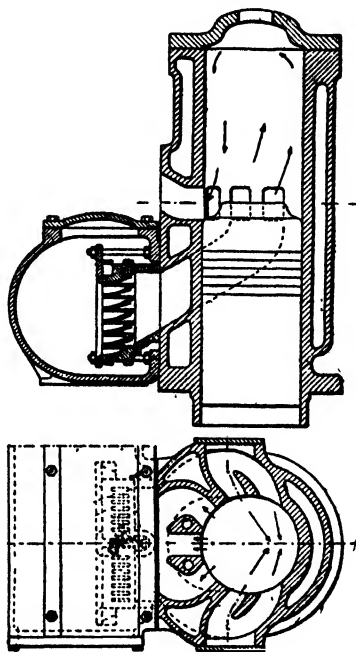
ENGINE WITH CHECK VALVE IN INLET PASSAGE.
